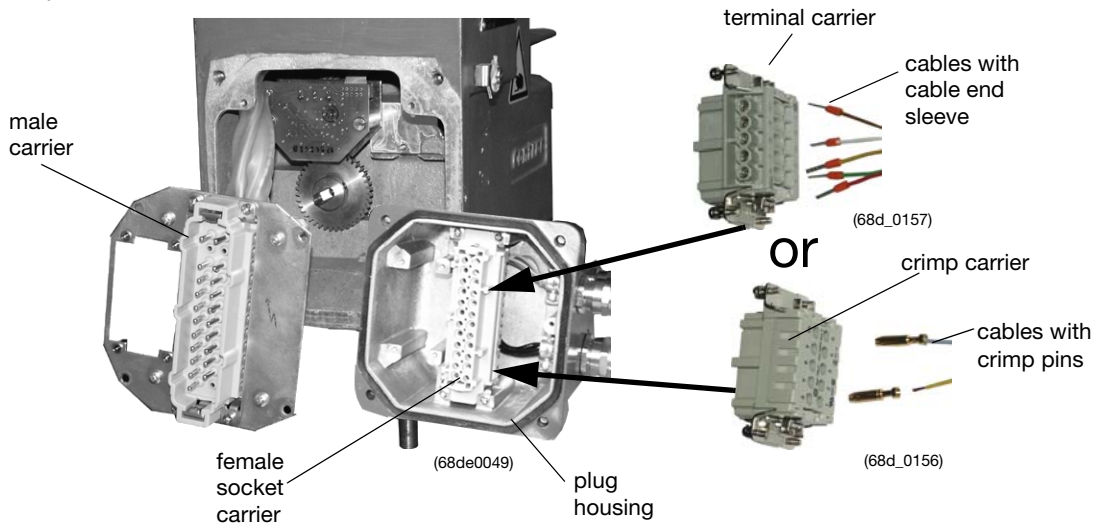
Exemplary illustration of cable connection to the actuator; plug housing may contain alternatively a terminal carrier or a crimp carrier.
